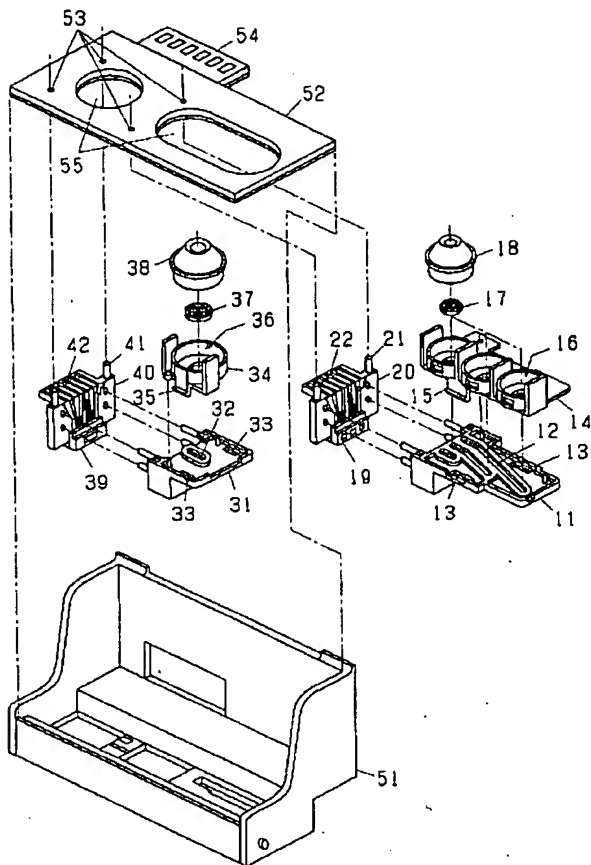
It is the decomposition perspective view showing an example of the print head of the conventional thermal ink jet mold.
